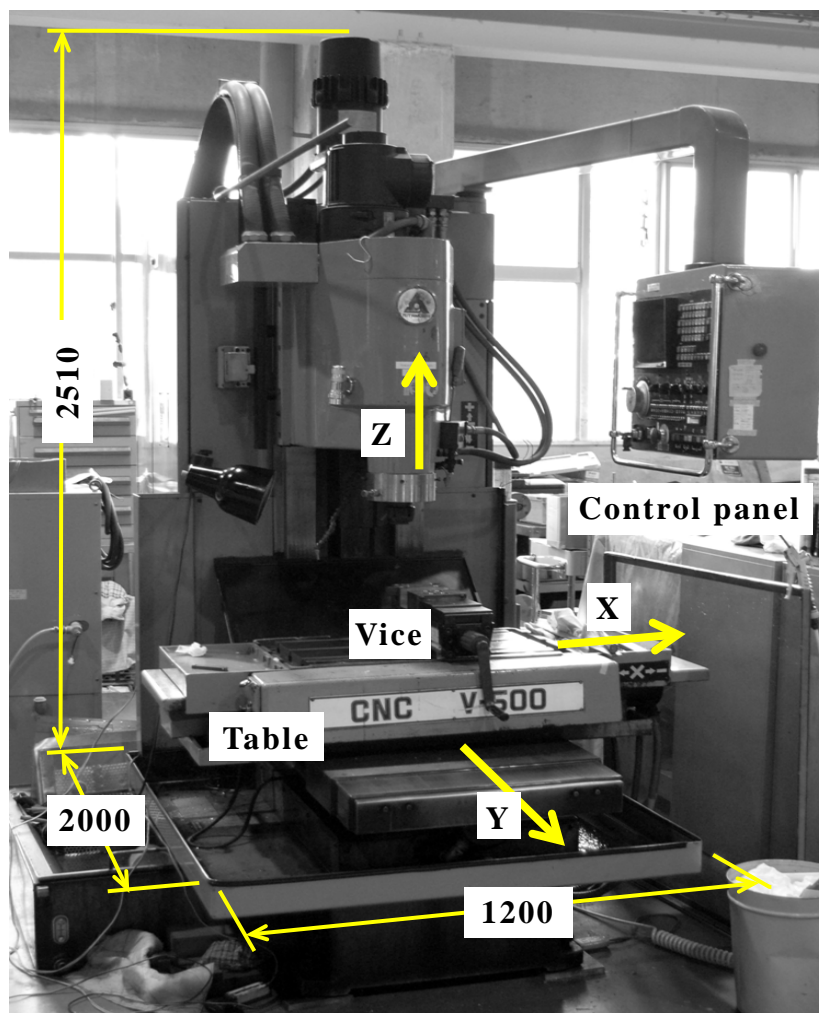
NC milling machine used in the experiment (Unit: mm)
